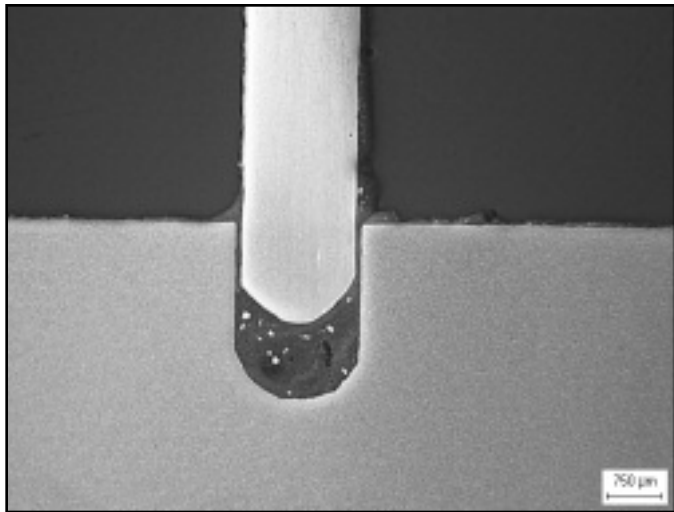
Macrostructure of brazed joint of Ti-6Al-4V (Grade 5) impeller made with the mechanically alloyed Ti-37.5Zr-15Cu-10Ni filler metal. No erosion of the base metal witnessed.
